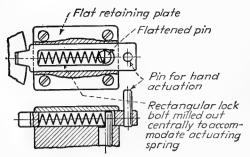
In this design the rectangular lock bolt is milled out centrally to accommodate actuating spring. A pin is provided for hand actuation when desired.
